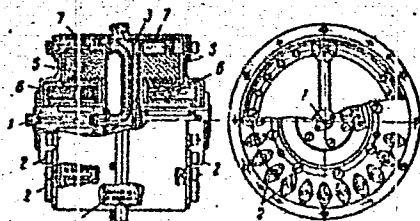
1--connector mounted along the axis of symmetry; 2--connectors on the stator faces; 3--rotor; 4--sections of coaxial line on the rotor; 5--discs; 6--control solenoids; 7--sections of coaxial line on the discs
